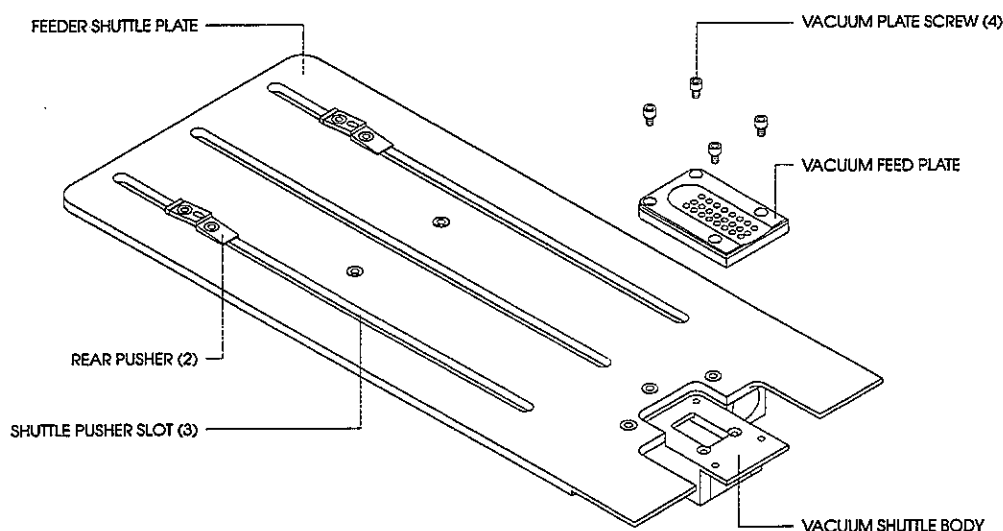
Shuttle feed plate illustrating all adjustment points including the feed plate and pushers.
